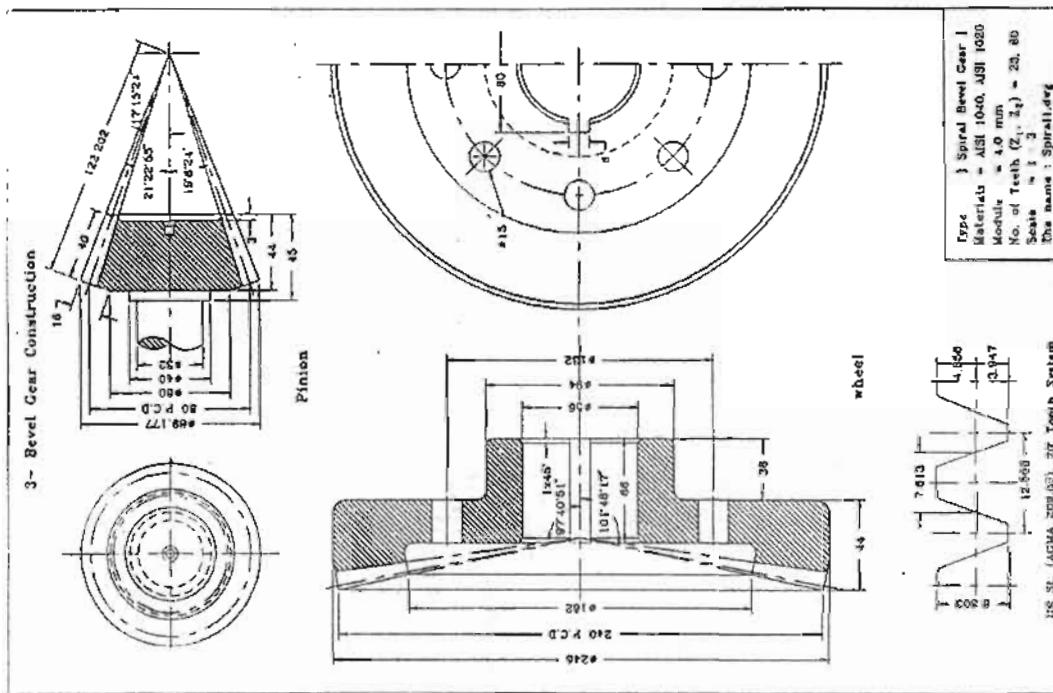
Construction drawing of spiral bevel gears pinion and wheel for 100 Kw power, 3000 rpm input speed, 3 gear ratio and 120° shaft angle.
